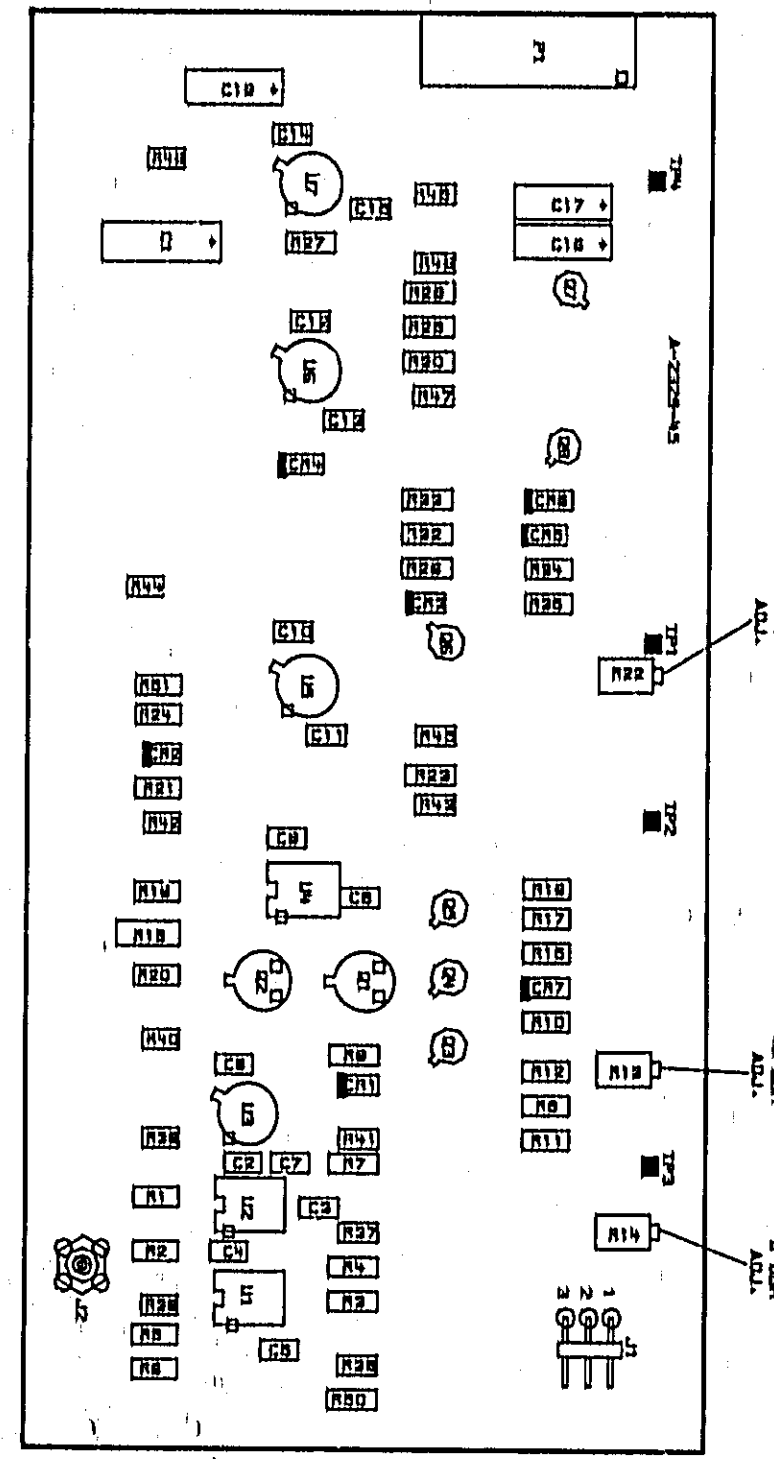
A4 Signal Conditioning Board, Component Locations
